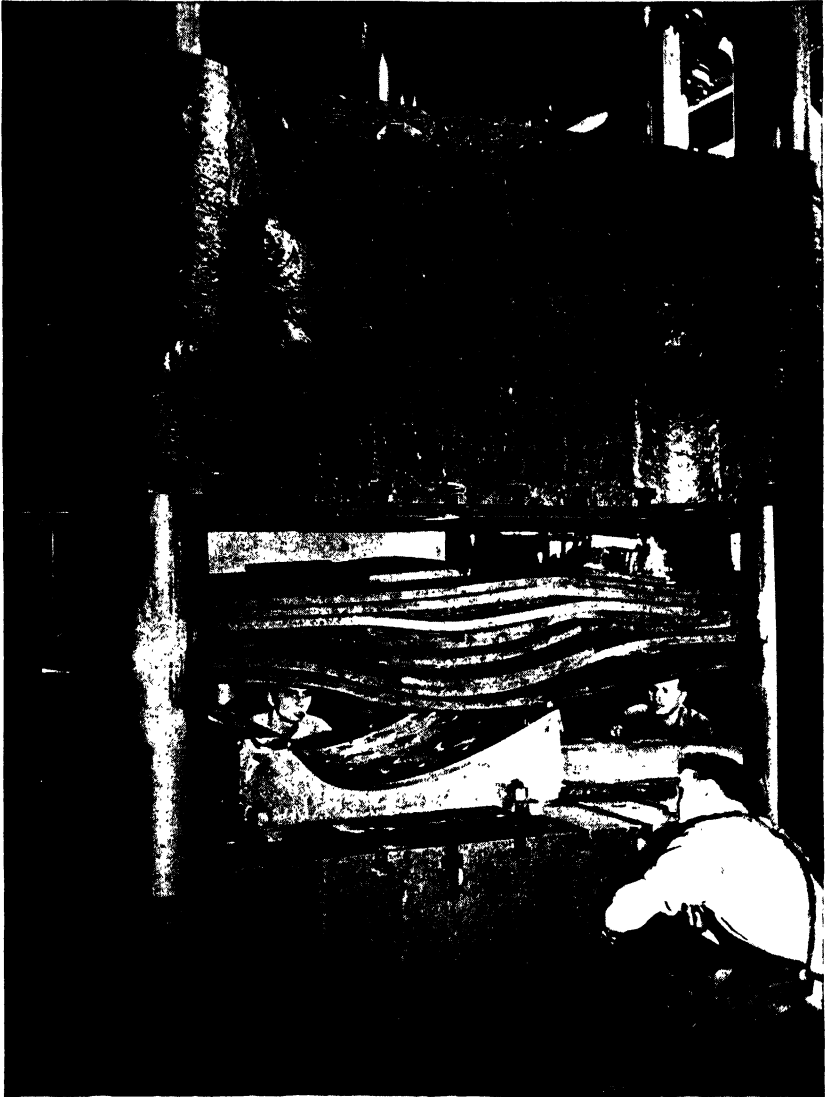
PLATE XXIV.—Preparing the blanks to be subsequently formed in hydropresses. A high-speed crank-driven motor-drive press set up with punches and dies for cutting blanks and piercing holes in the parts formed in Plates XX and XXIII. (Cleared by the War Department for Lockheed Aircraft Corporation.)
